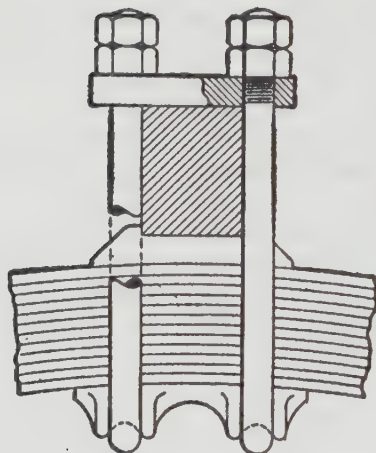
TIMKEN ADJUSTABLE SPRING PERCH.
